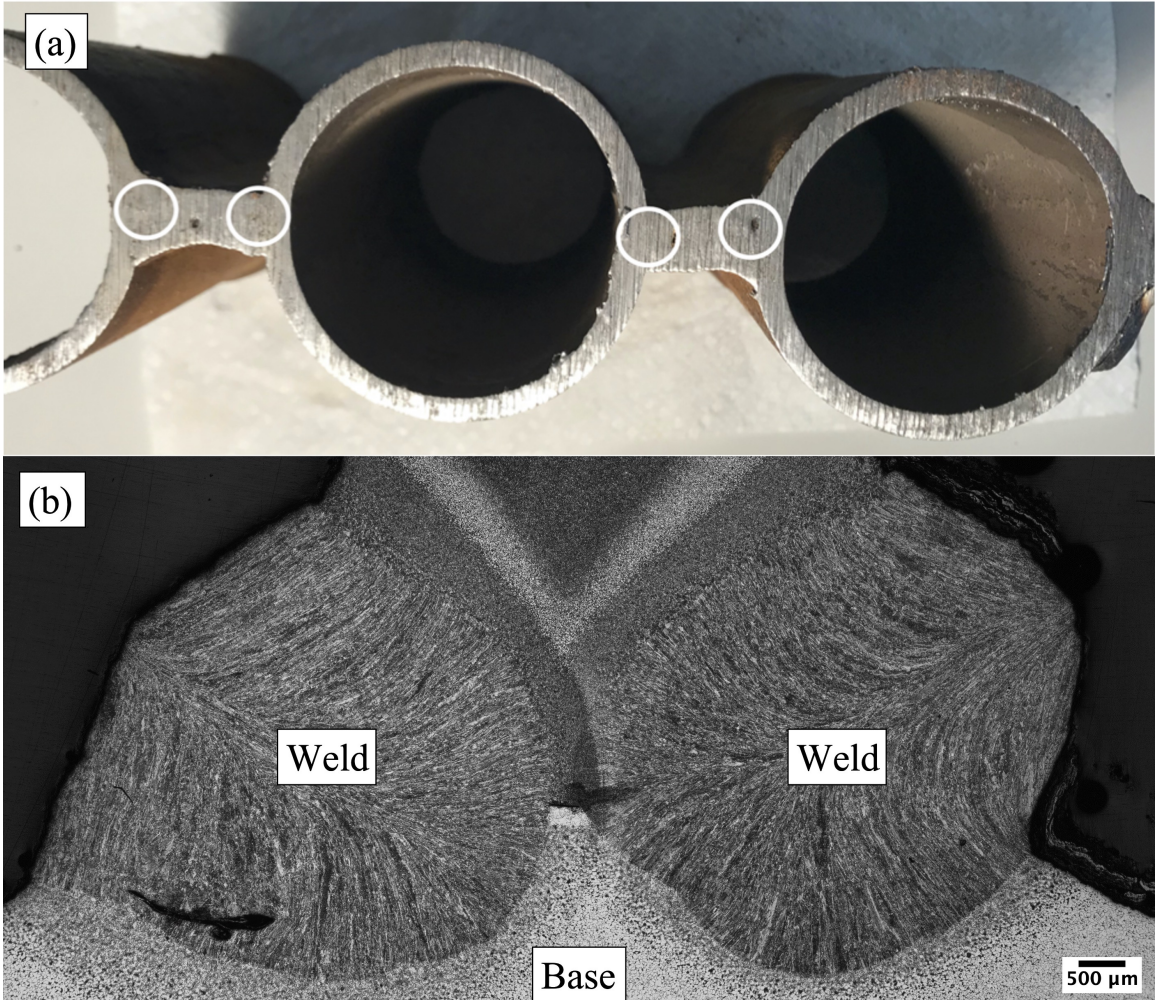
(a) Section of water walls showing extraction locations of round tensile specimens for welded membrane samples and (b) Macrograph of extraction site for welded membrane specimens
